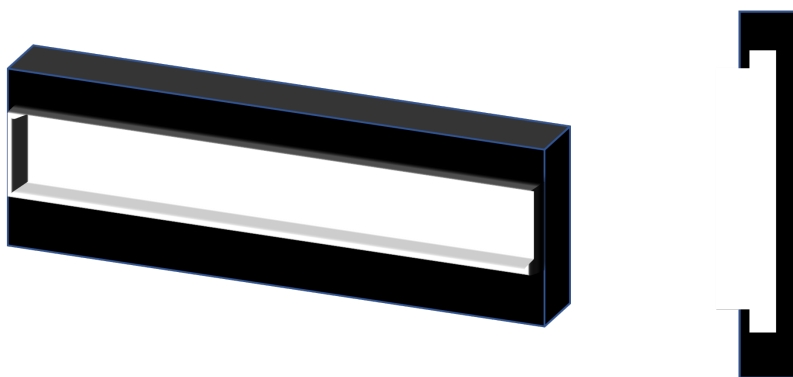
Left: Digital model of the first slide holder. It is hollow through the middle with rails on the top and bottom to hold the slide. Right: Profile view of the slide holder showing how the rails hold the slide. This would be fixed at a 45° angle to the beam.
